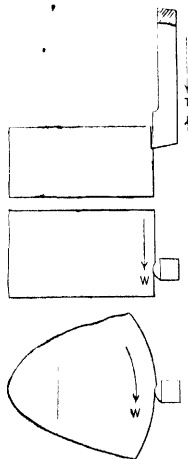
Diagram illustrating principle of operation of slotting machine.
